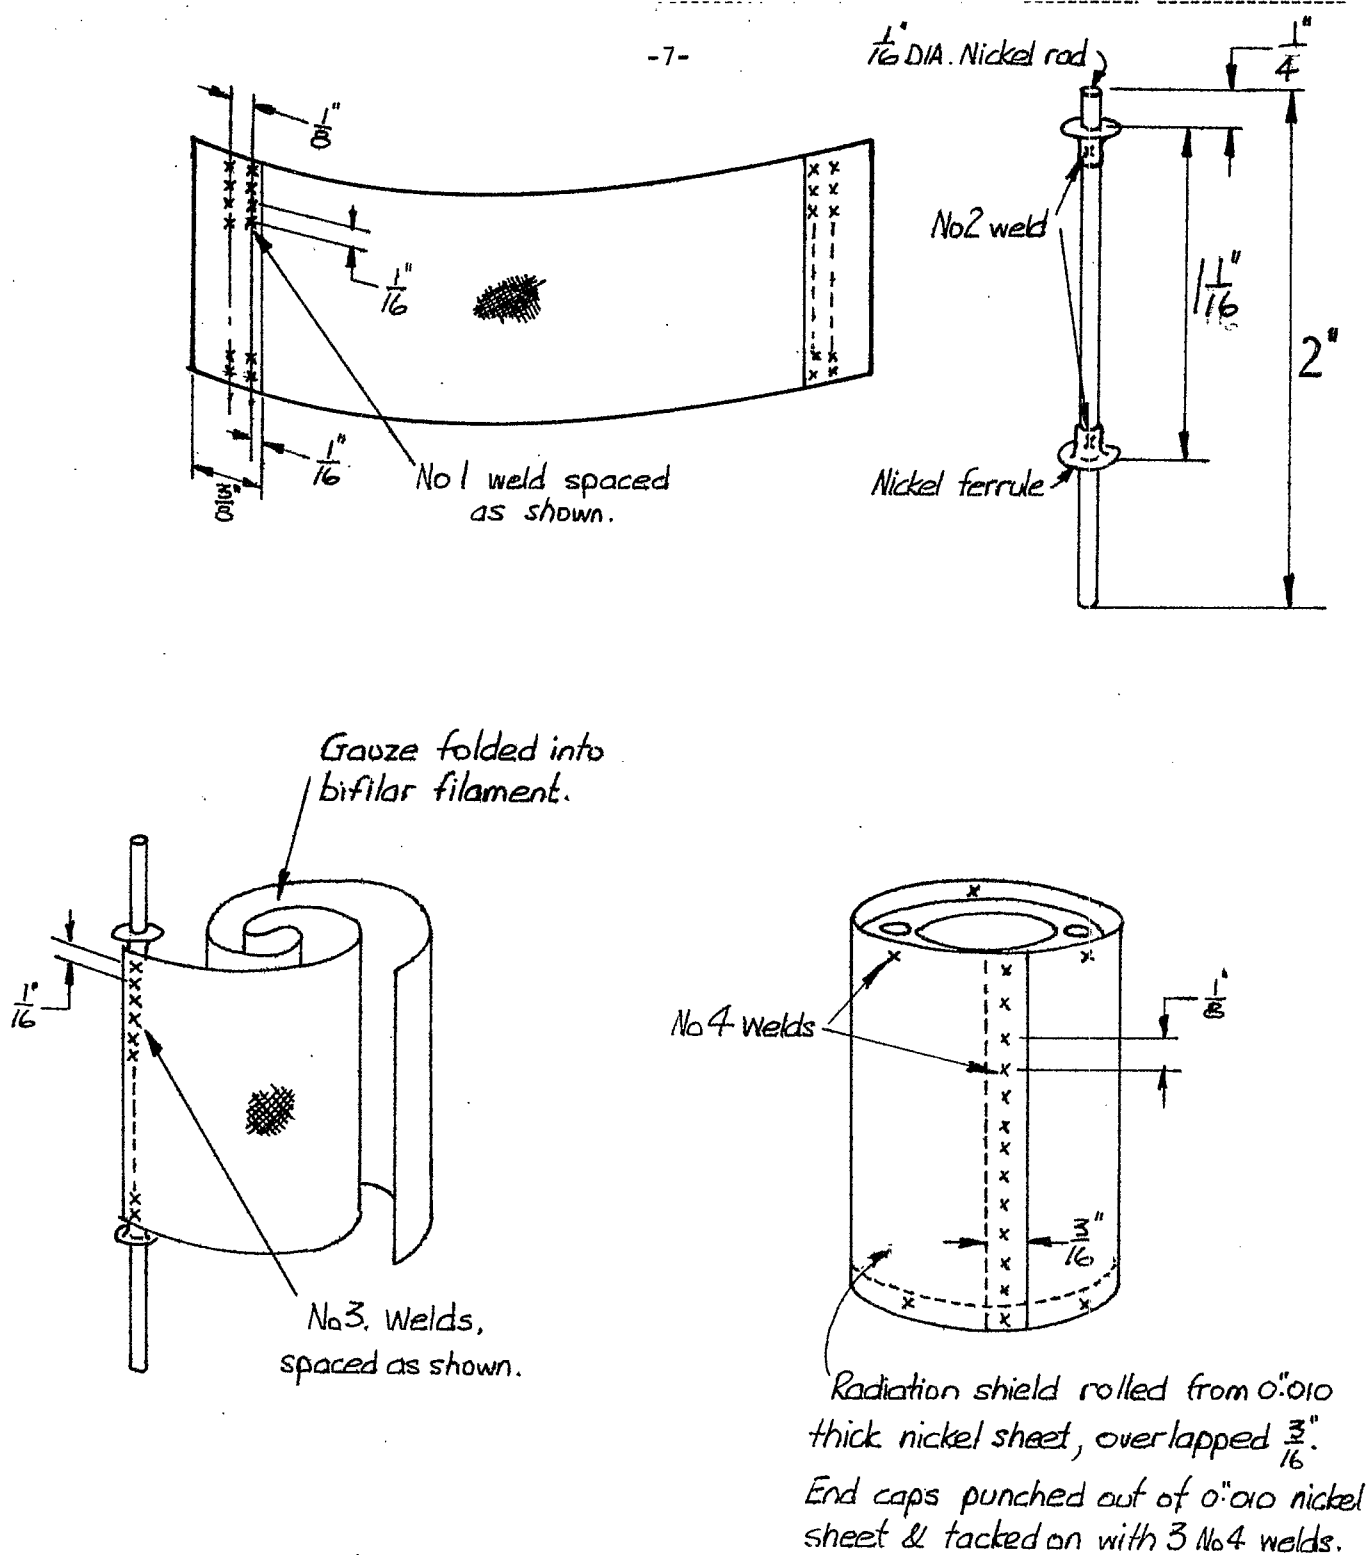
Details of spot welds used in construction of Mk II cathodes.
